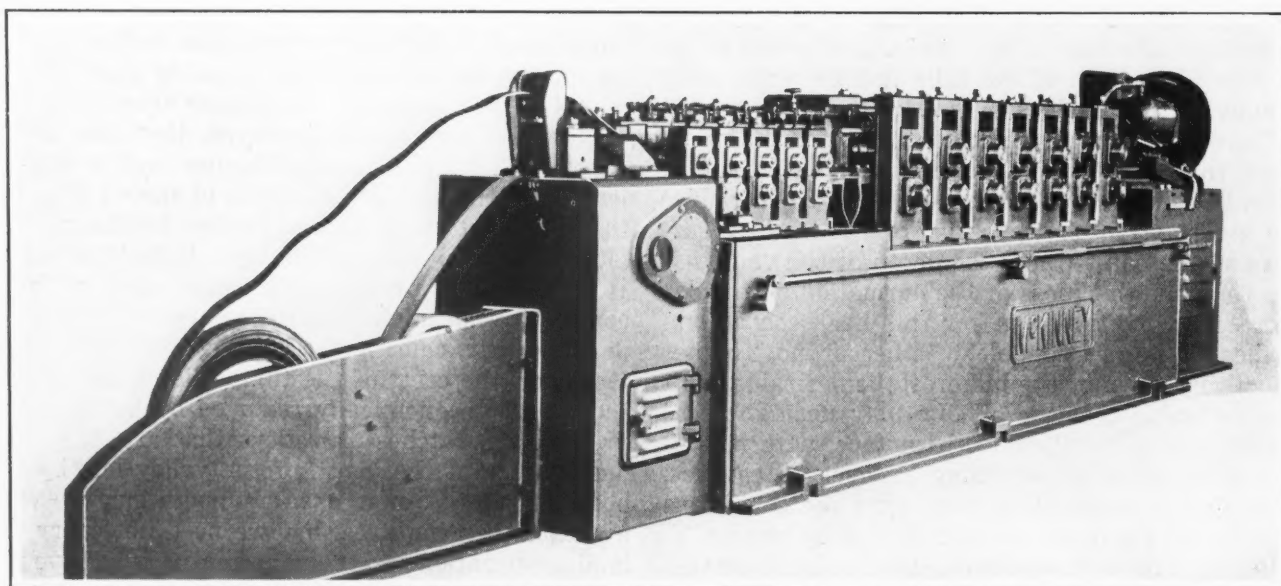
Rolling Machine, in which Two Strips of Stock are Formed into Tubing that Has a Thin Outer Covering of Stainless Steel, as Shown in Fig. 1
